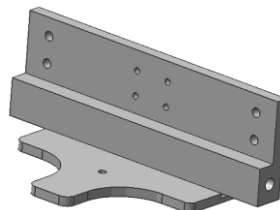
The aluminum rotator piece, welded to the seat pan support, which takes most of the load of the weight of the infant.
